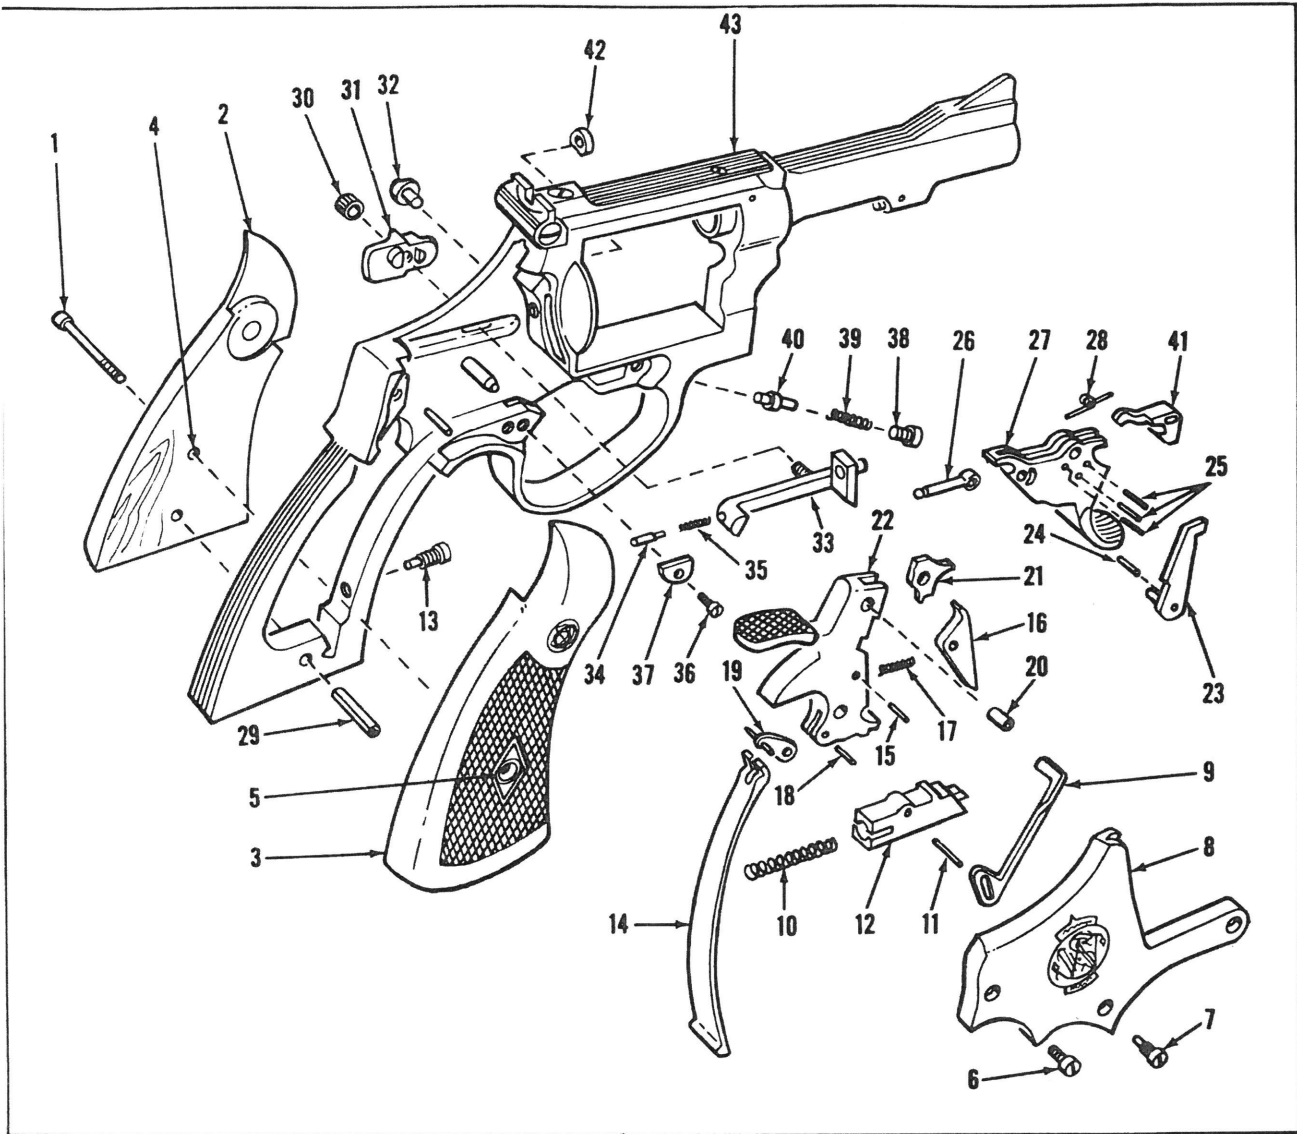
Trigger, Hammer, Frame Assembly and Barrel Group
